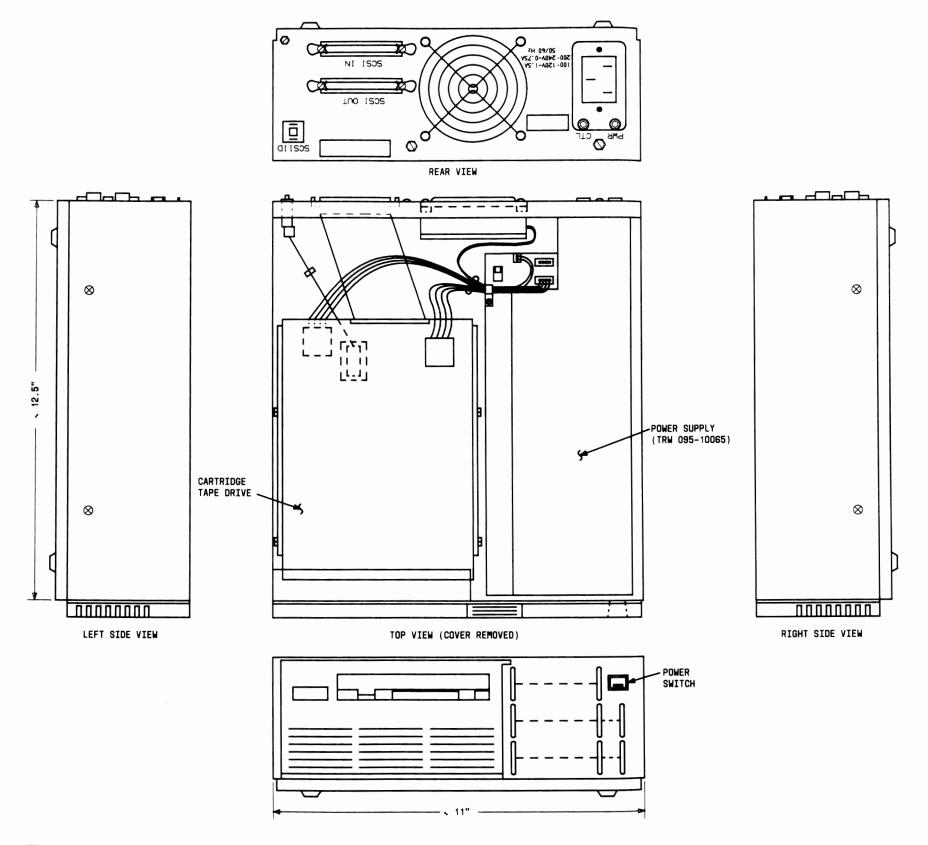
AT&T SCSI TM Cabinet Assembly Drawing (ED-3T011-30,G4, G7)
